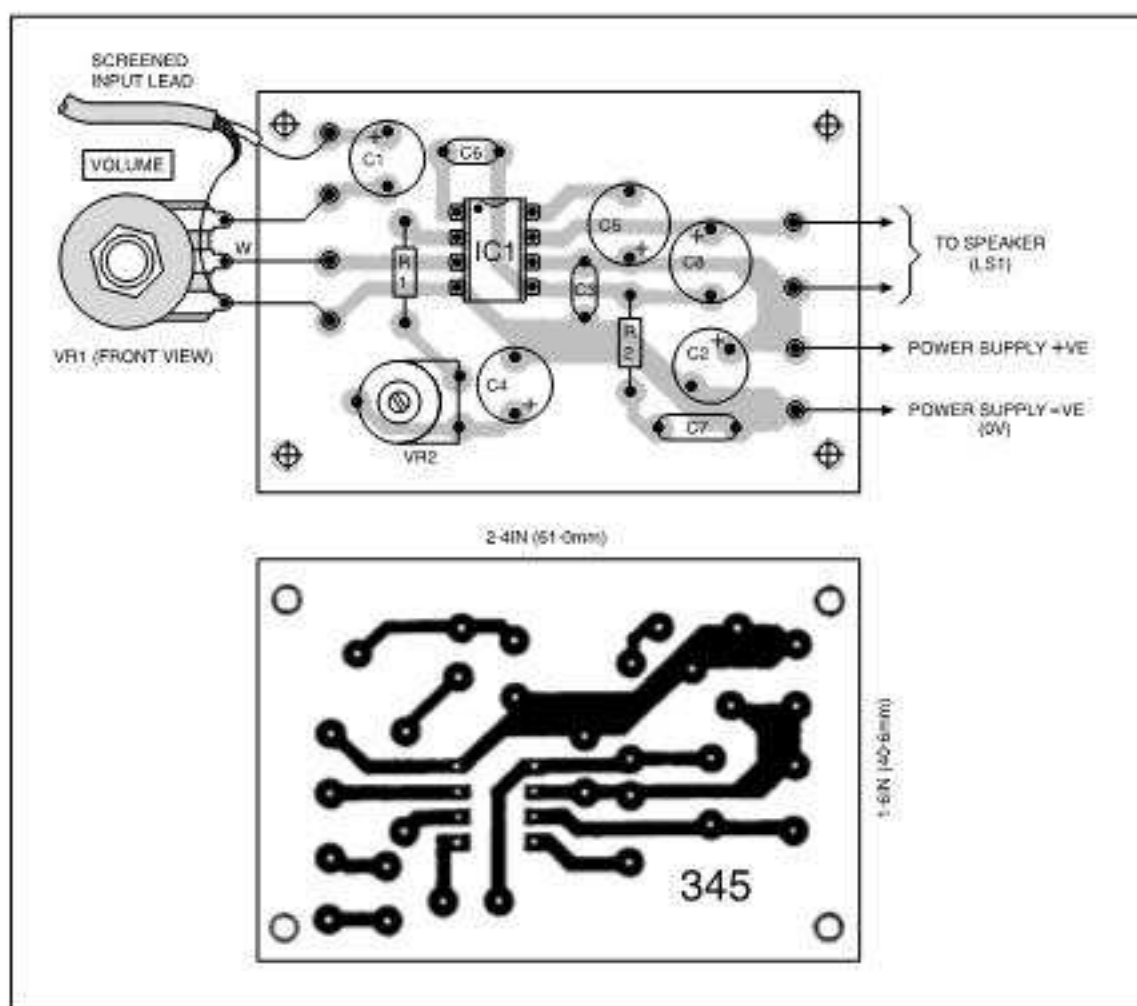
Topside component layout, off-board wiring details and full-size copper foil master for the TBA820M Amplifier.
